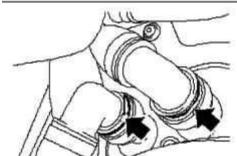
Connecting the hoses of the cooling system: 1 - socket radiator heater, 2 - clamps, 3 - locking mechanism
